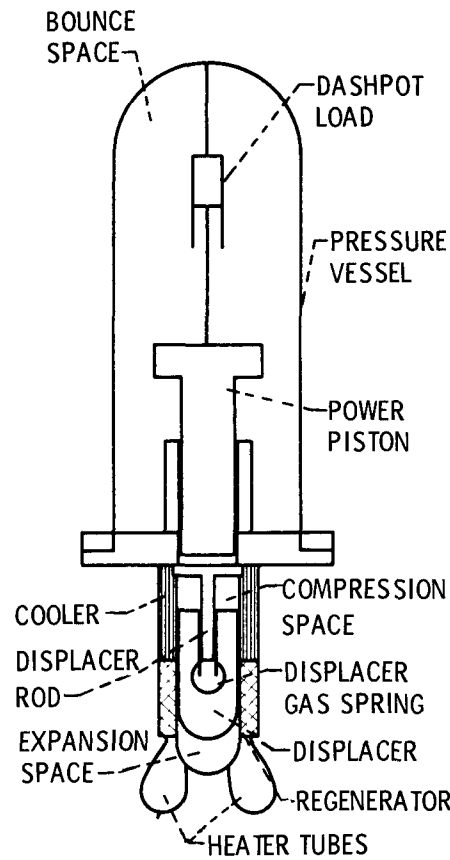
Component layout of RE-1000 free-piston Stirling engine.
